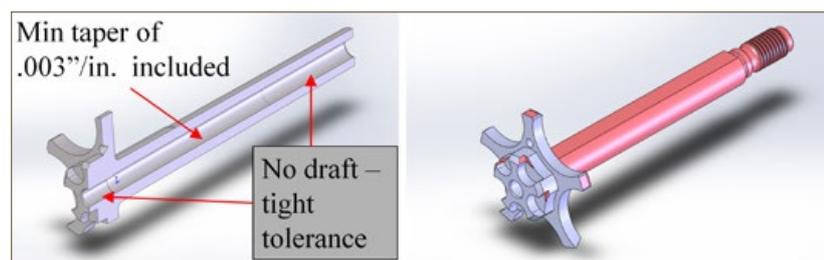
Illustration of the MIM ejector part showing the tight tolerances required (left) and (right) details of machined areas (pink) versus as-MIM'ed
